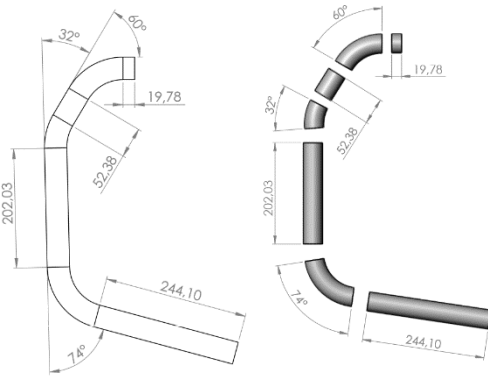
Conduit blueprints: bent type A (left), sectioned B type (right).
